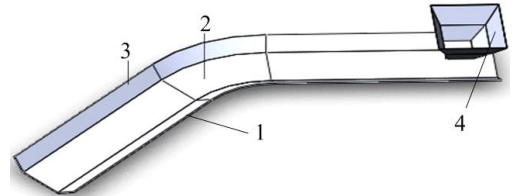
Three-dimensional model (1.Lateral conveyor belt 2. Middle conveyor belt; 3.Inside conveyor belt)
